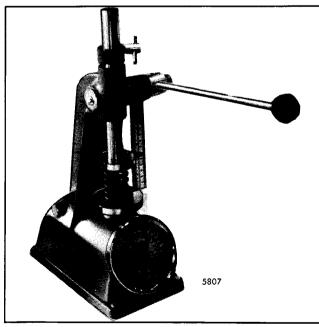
Testing Valve Spring using Tool J 22738-02
